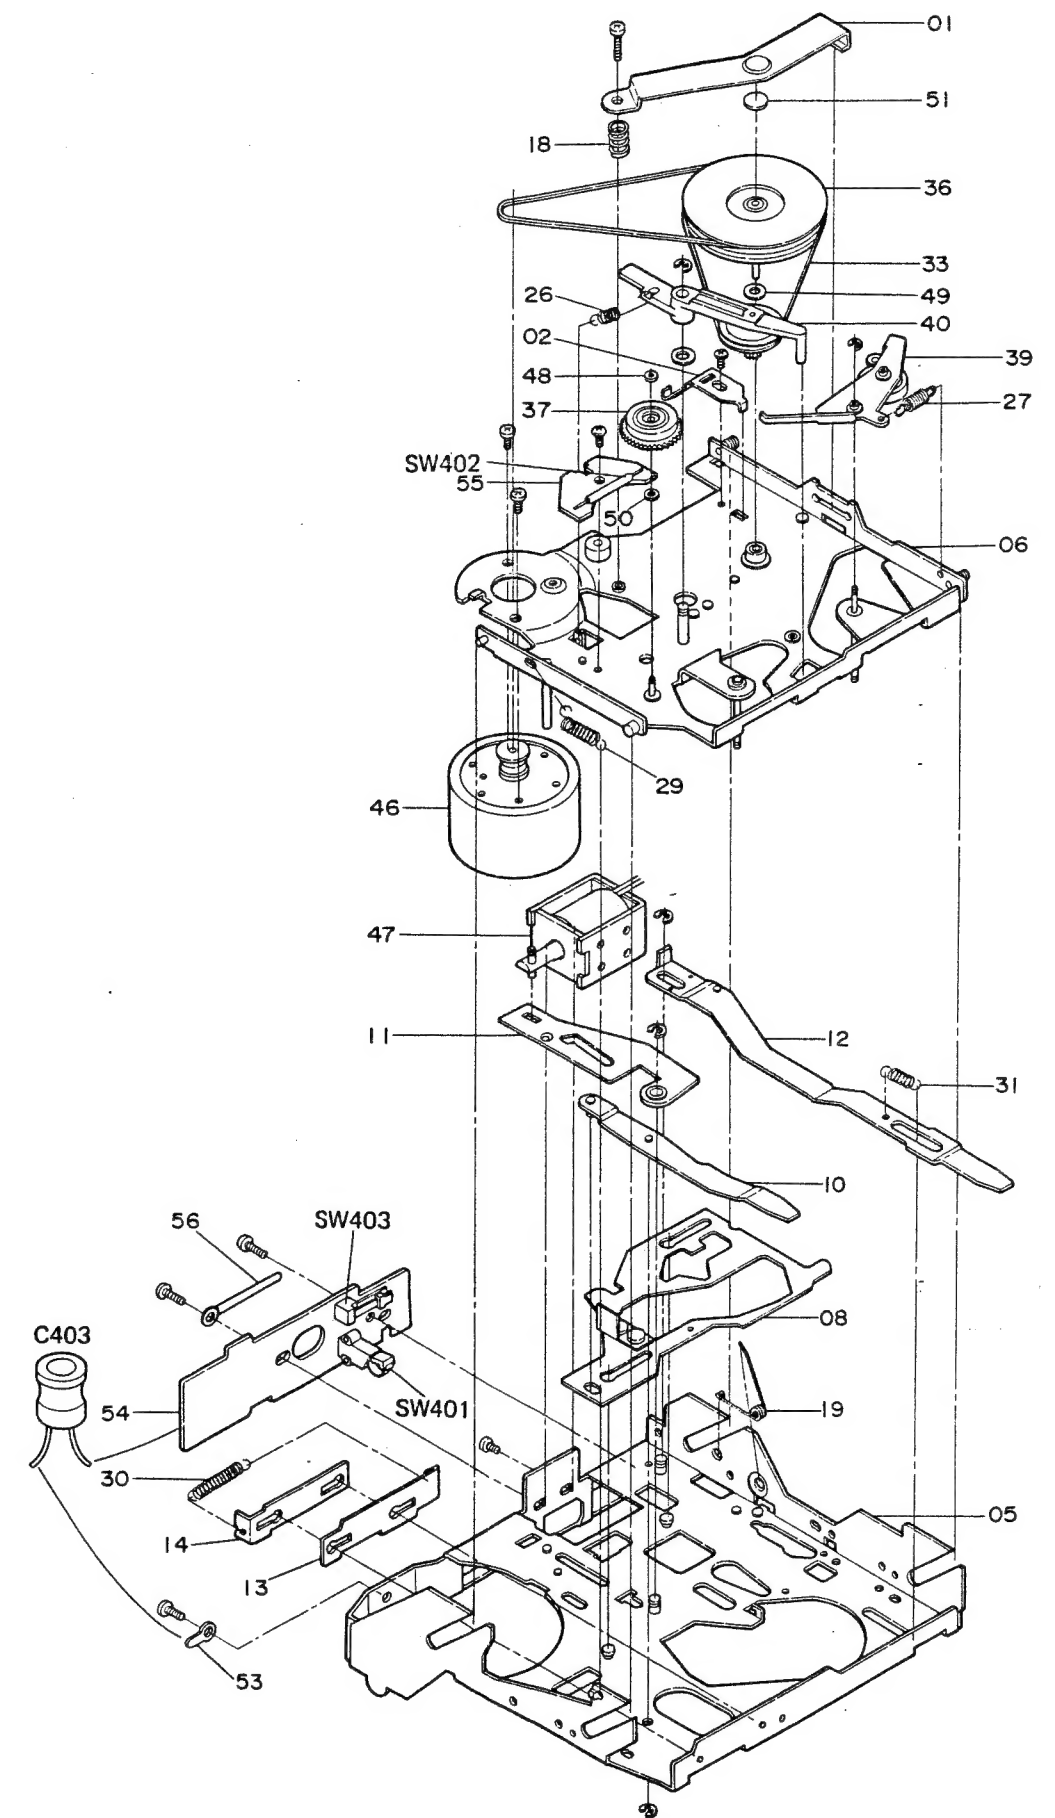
MECHANISM EXPLODED VIEW (LOWER SIDE)
